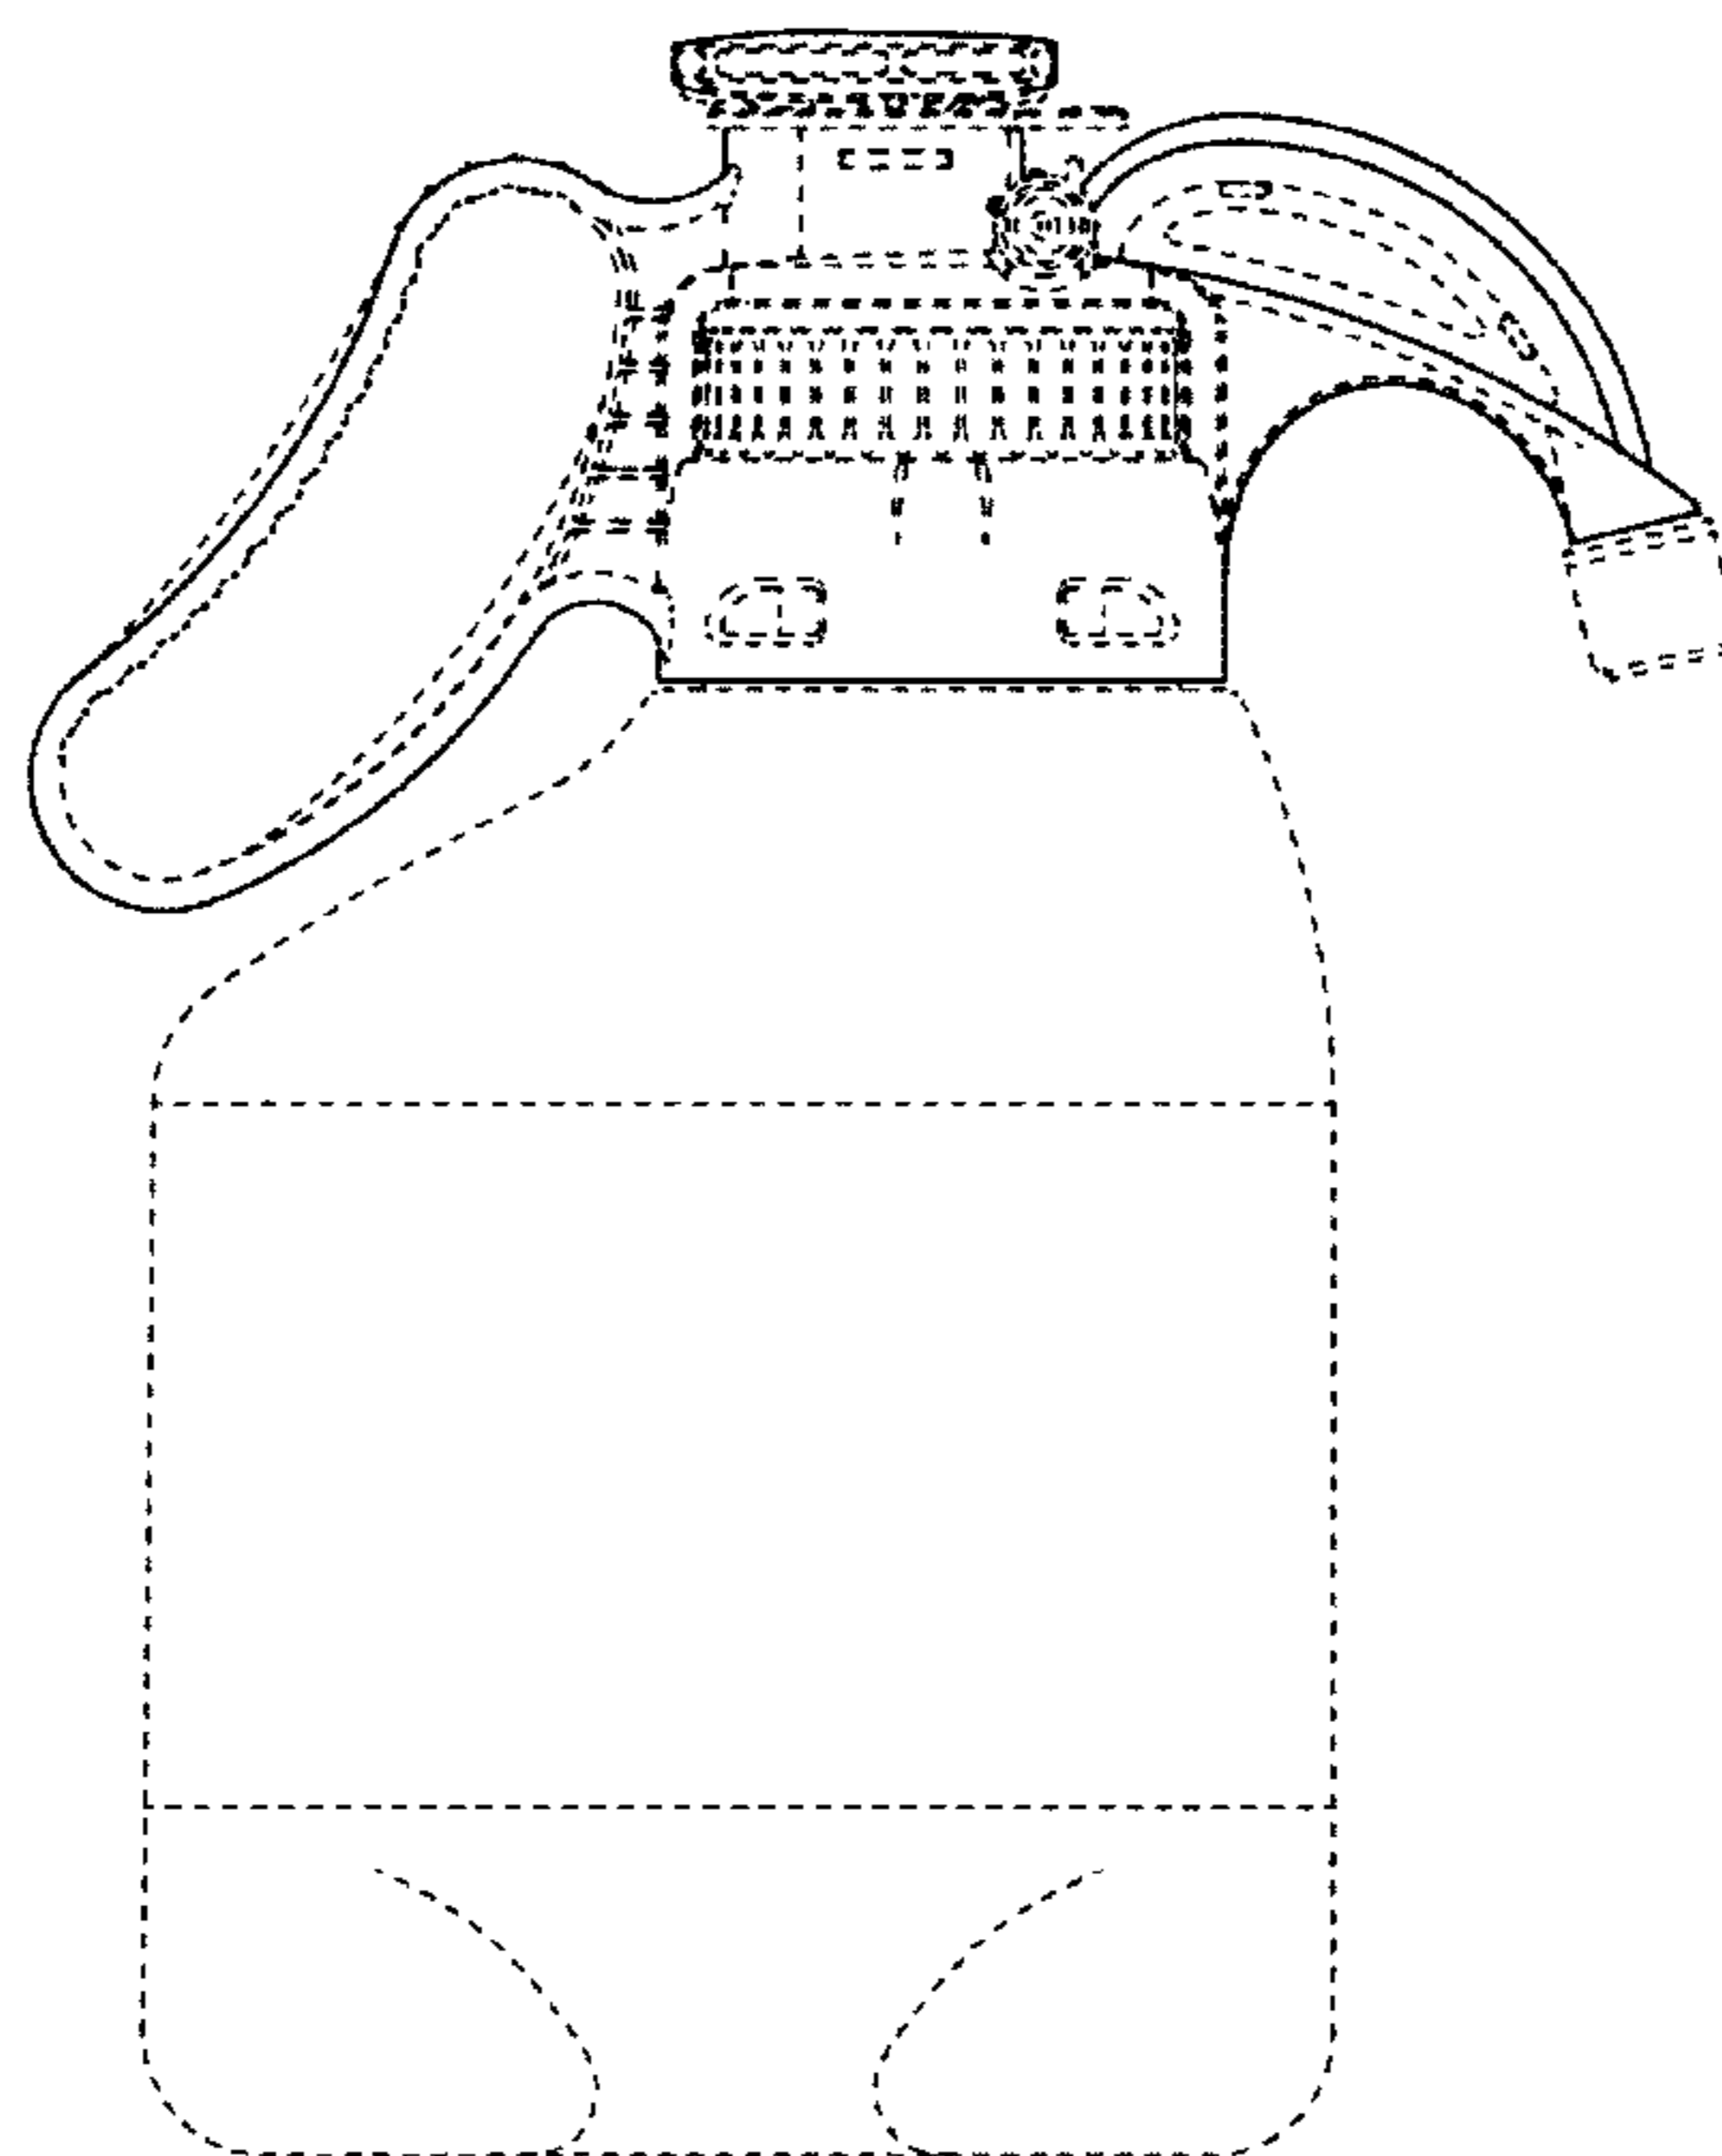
is a left side view of a dosing assembly embodying the invention.
